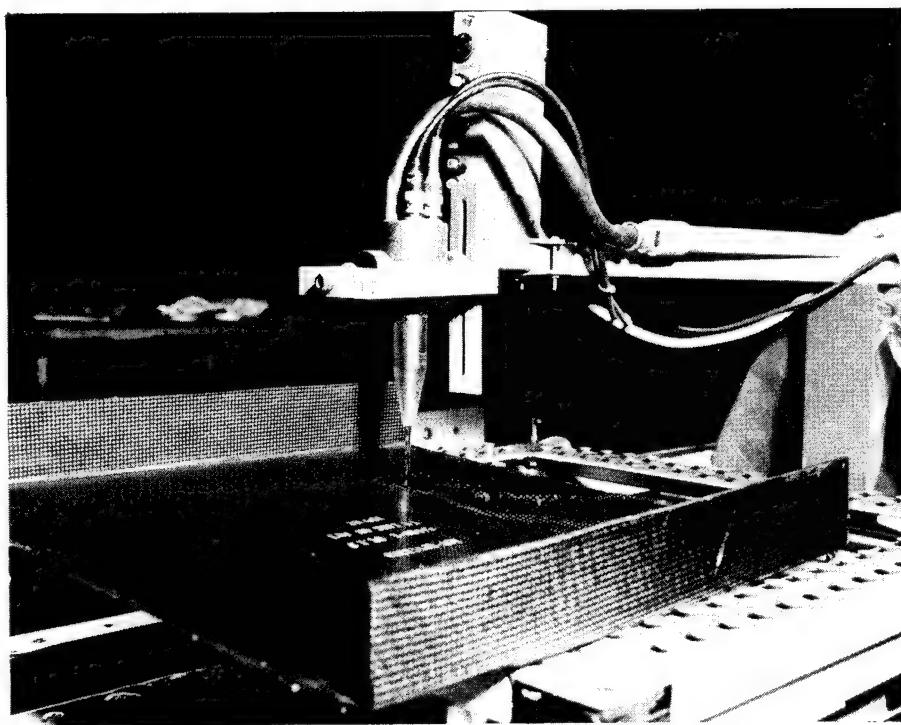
Through-Transmission Ultrasonic Inspection—Details
